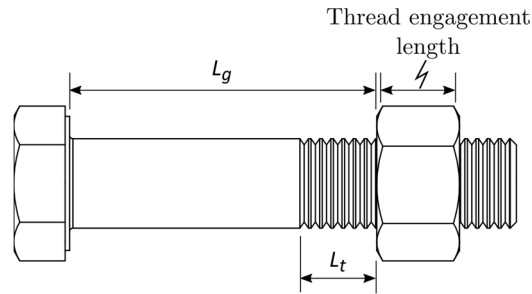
Definitions of grip length L_g , threaded length L_t , and thread engagement length.
